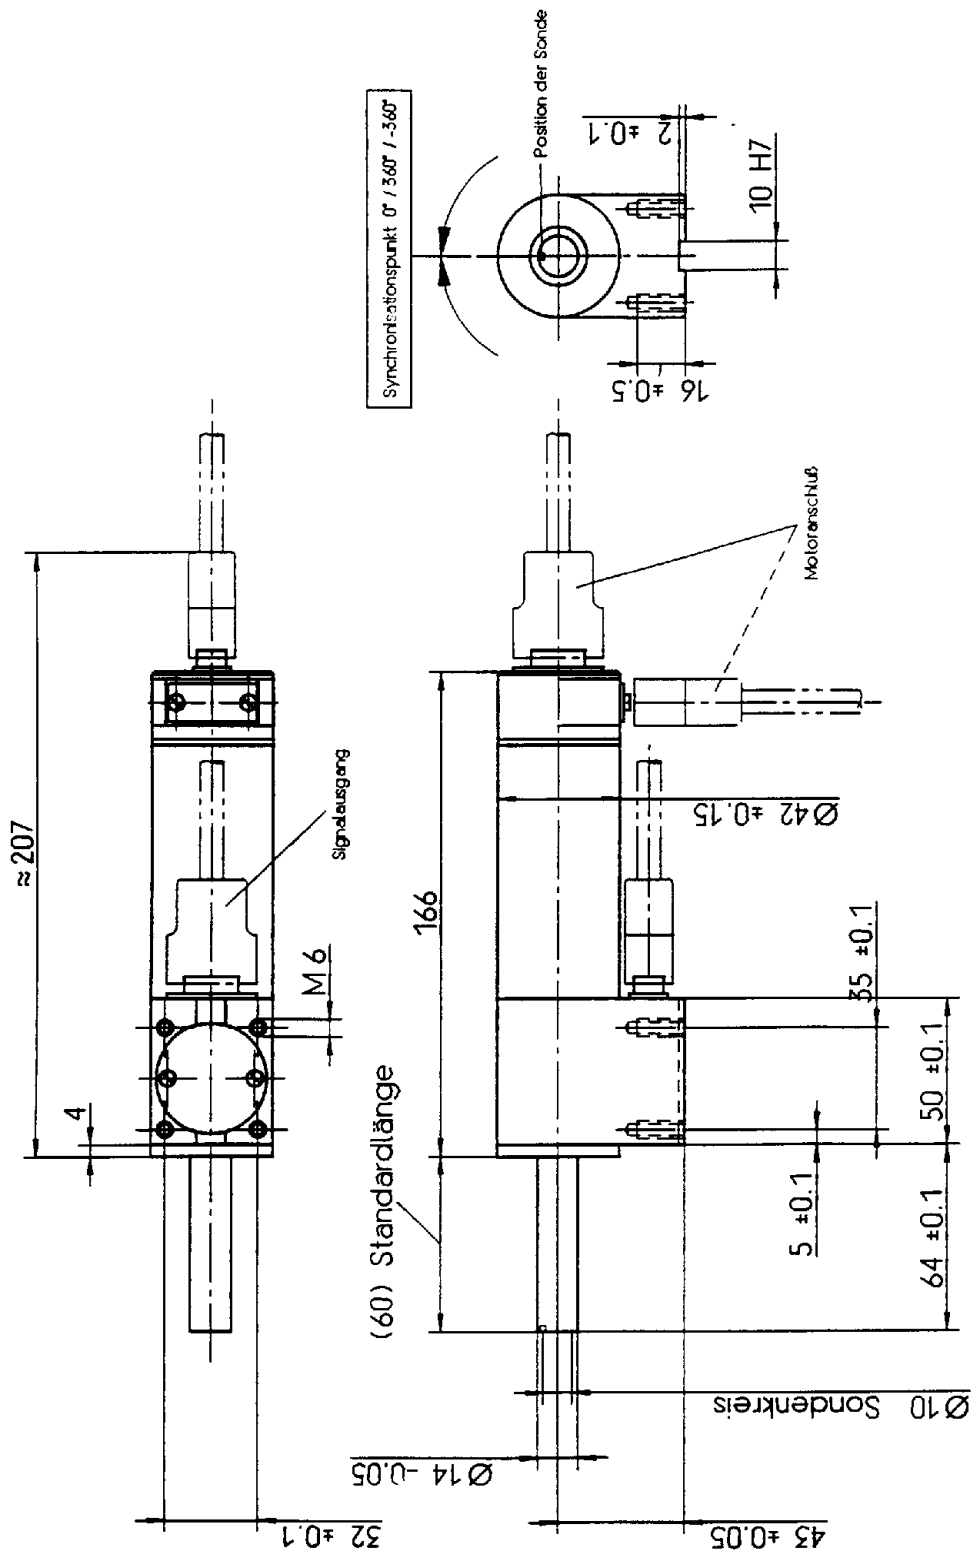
Dimensions of the Rotating Probe 6.481.01-1600 in its standard version. Because of different shaft dimensions the other versions can vary in their dimensions.
